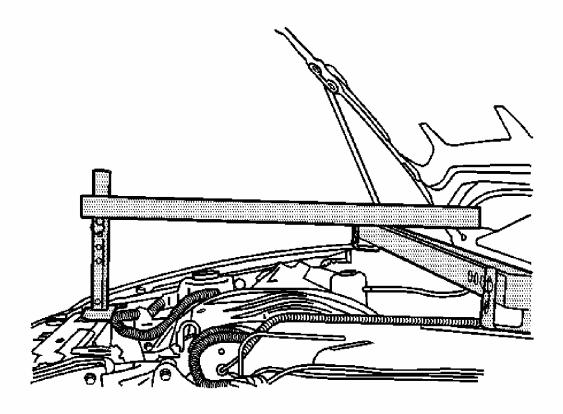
View of Radiator Shelf Tube & Strut Tower Tube Courtesy of GENERAL MOTORS CORP.
